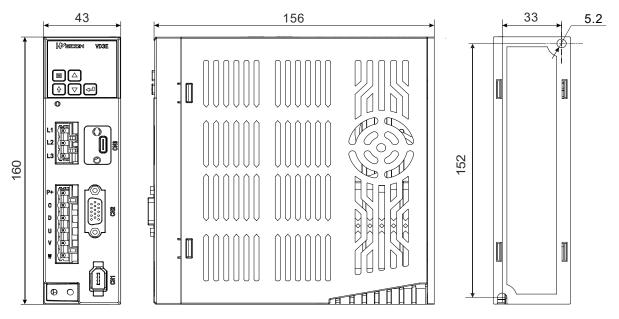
Installation Dimensions of VD3E Type A Servo Drive
